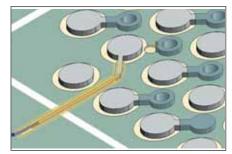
Solder a foil jumper to the tail extending from the new BGA pad.
